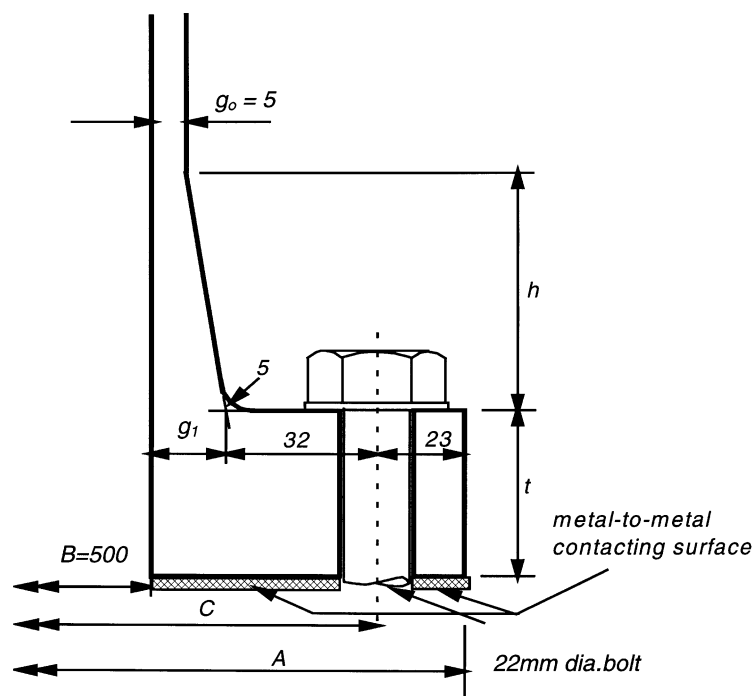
Details of metal-to-metal flange for parametric study (dimensions in mm).
